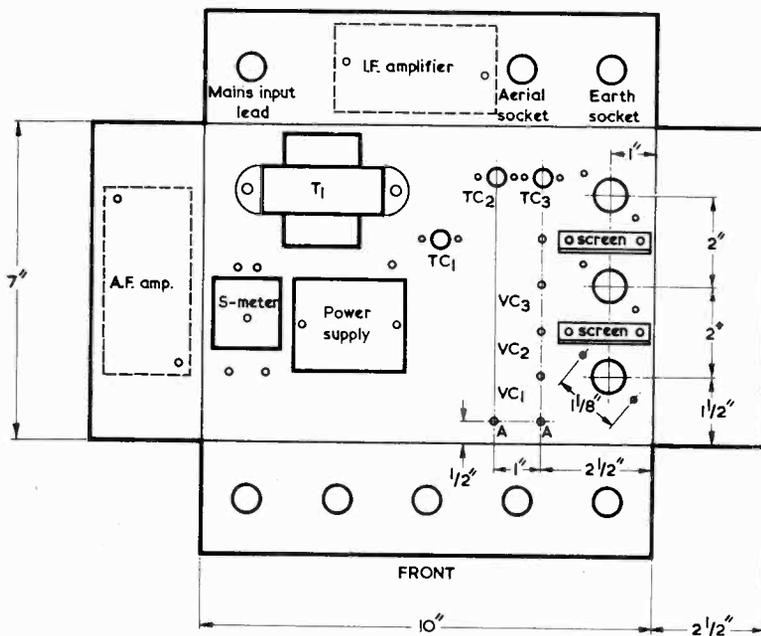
Top view of the chassis. The sides are shown opened out to assist in illustrating the layout
